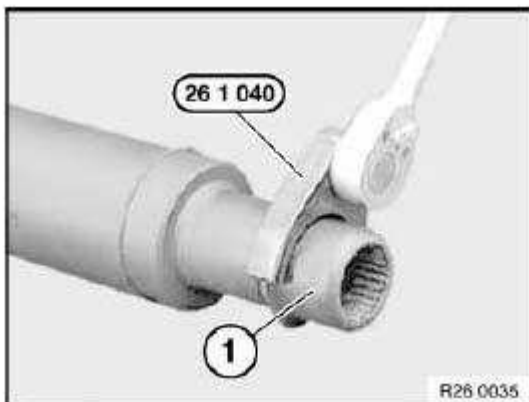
Threaded Ring Of Propeller Shaft And Special Tool (26 1 040)
